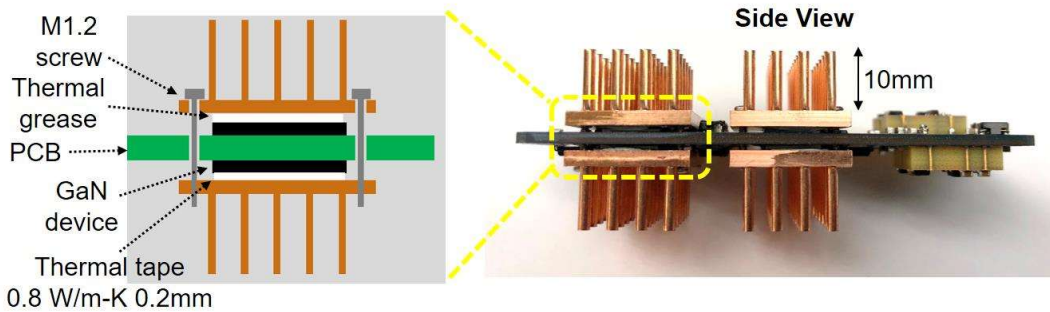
Side view of the heat sink design for the switching cell using four paralleled GaN HEMTs
